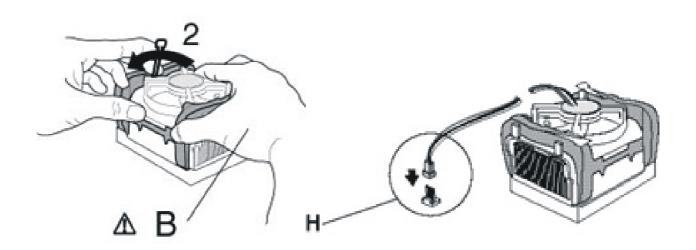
Installing the Fan Heatsink (6) Close Clip Lever (2), While Holding the Topside of Fan Heatsink (B)
